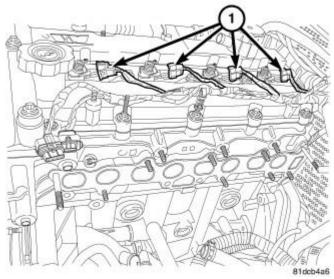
Fuel Injector Harness Courtesy of CHRYSLER LLC
